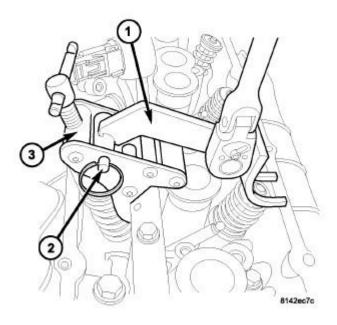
VALVE SPRING TOOL ADAPTER Courtesy of CHRYSLER LLC
